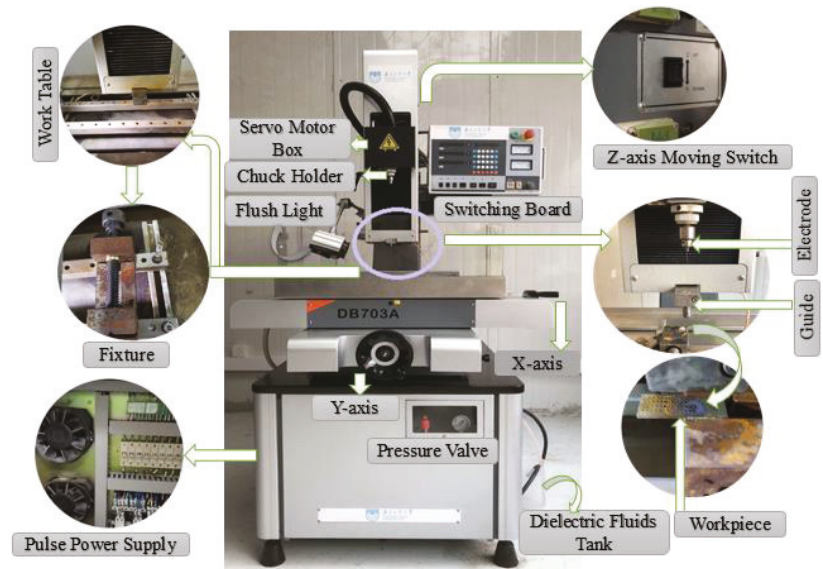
Photograph of the electrochemical discharge machining (ECDM) machine tool.
